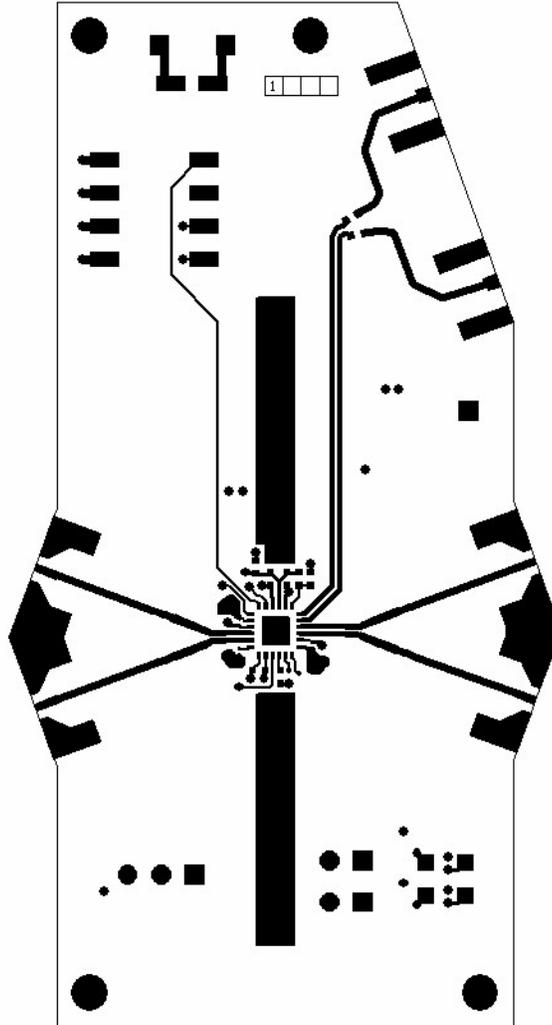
XBN2003 PCB Layout — Top Comp.
